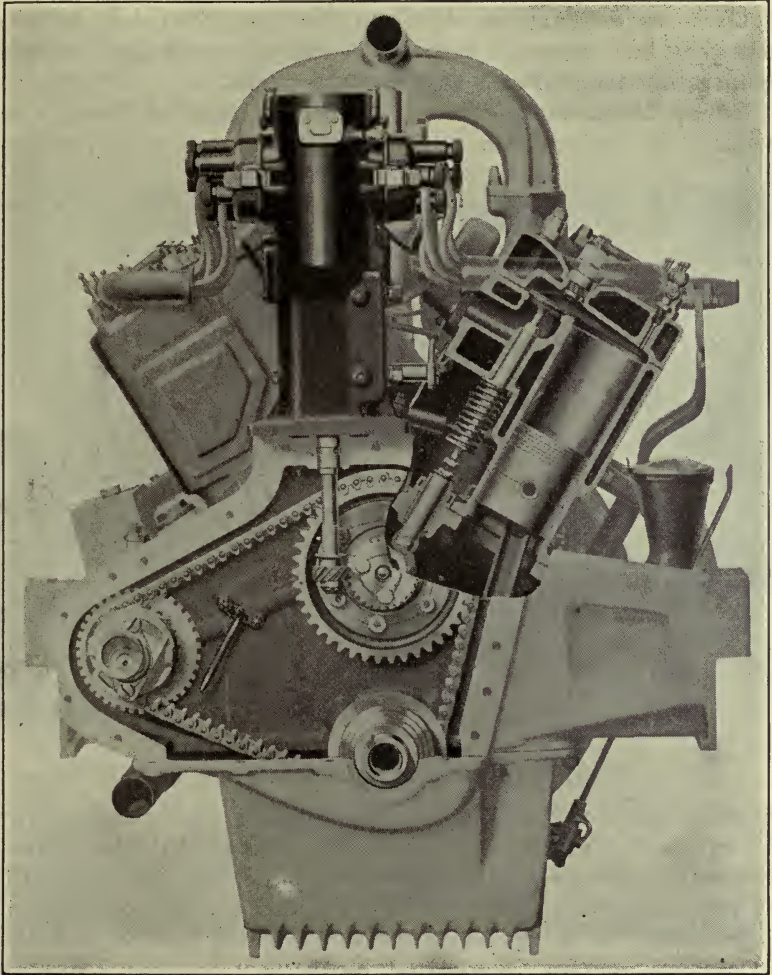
Packard Twin Six in Section. Note fins cast on bottom of crank case or oil pan. These assist in keeping the lubricating oil cool.
